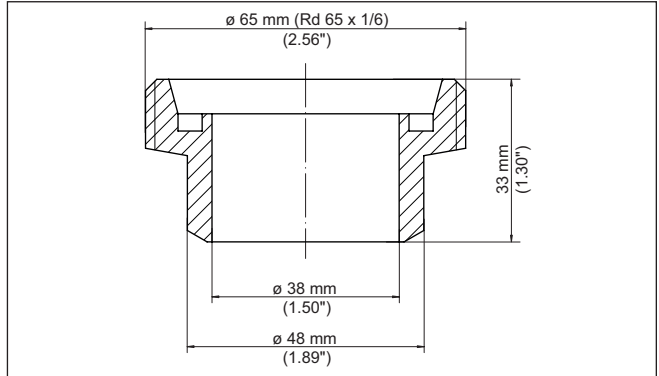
Dimensions of welded socket, slotted nut DN 40 (DIN 11851)
